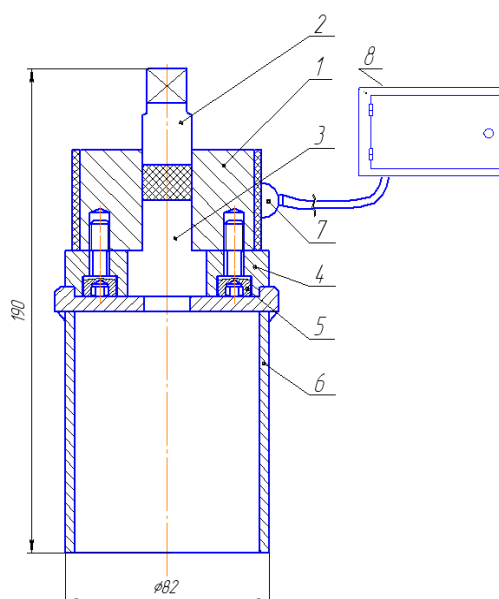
A sketch of the experimental design of thermo die mold (1-die, 2-upper punch,3- lower punch , 4- bolster, 5- fastening bolts, 6- crutch ejector, 7- heating ring, 8-electrical control cabinet.)
